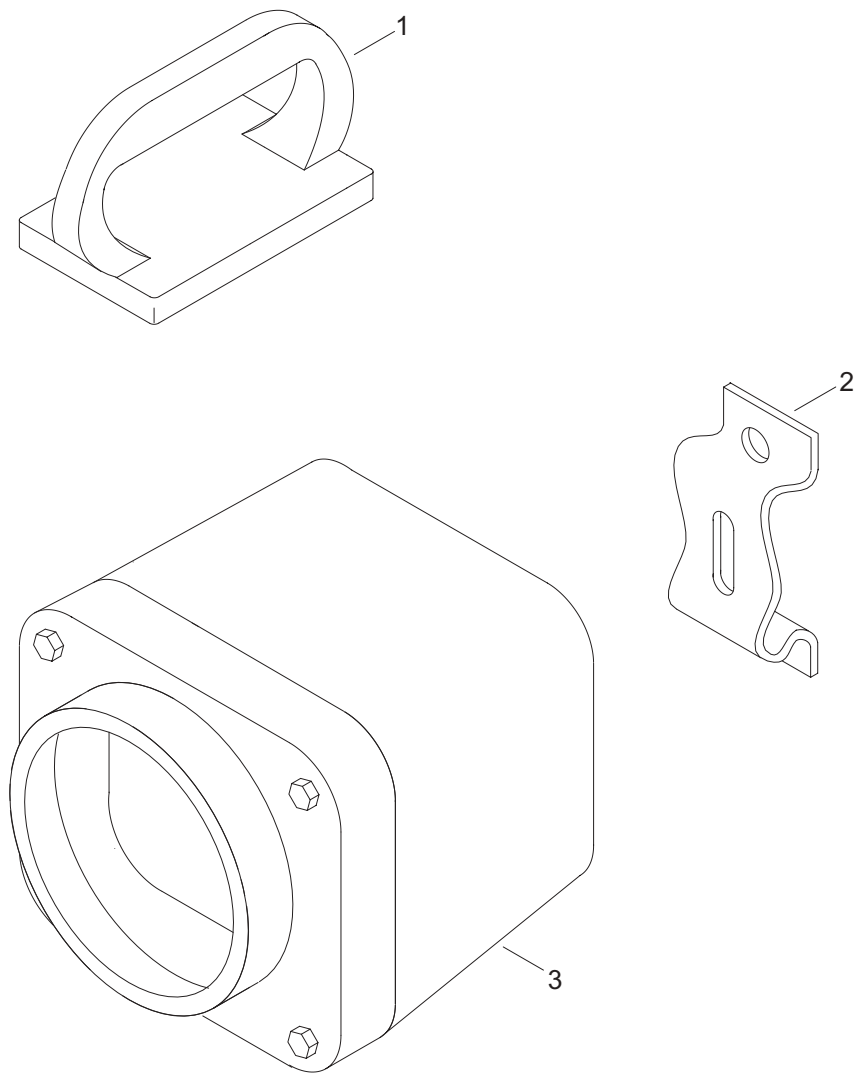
Generator Container Hand Lantern and Mounting Bracket
